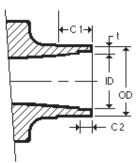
Opt-24 Butt Weld End Connection
